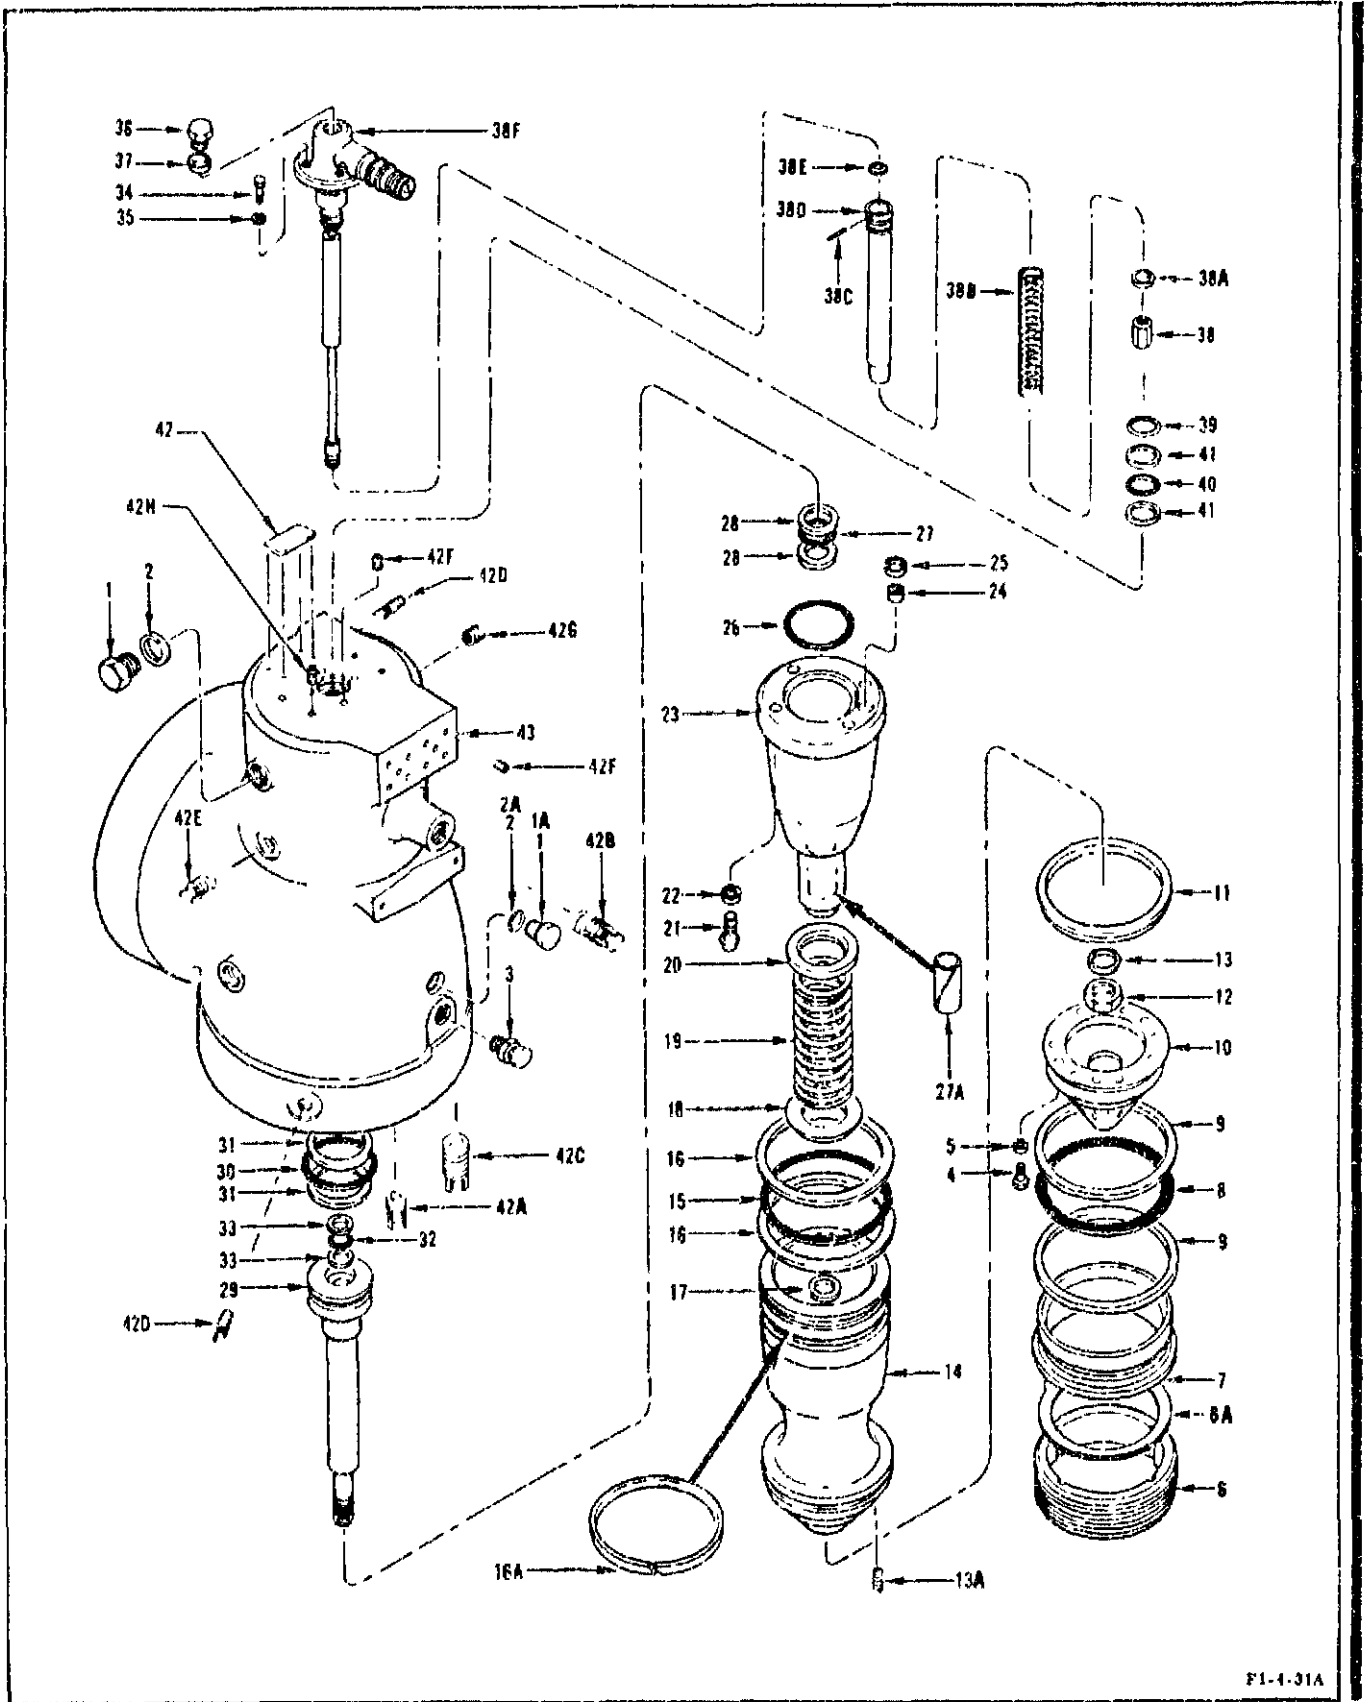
Fuel Valve--Exploded View (Sheet 1 of 2)
